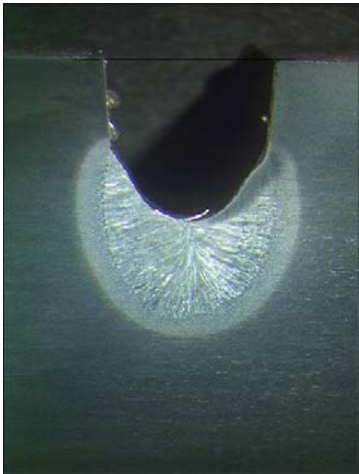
Welding Parameter Trials / Vertical Down Position
